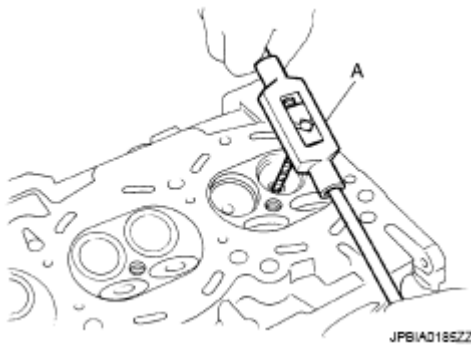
Reaming Cylinder Head Valve Guide (EXH) Hole
